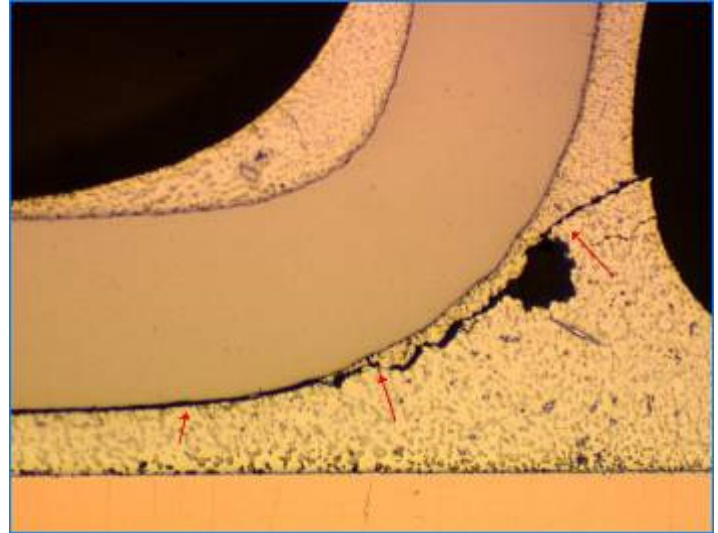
cross section, SN67, U62, left lead solder crack, 200xb
